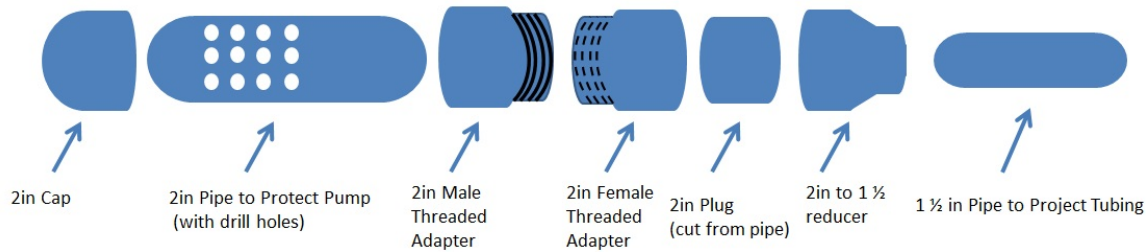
Schematic of PVC pipe pieces used to protect pump and pump tubing.
